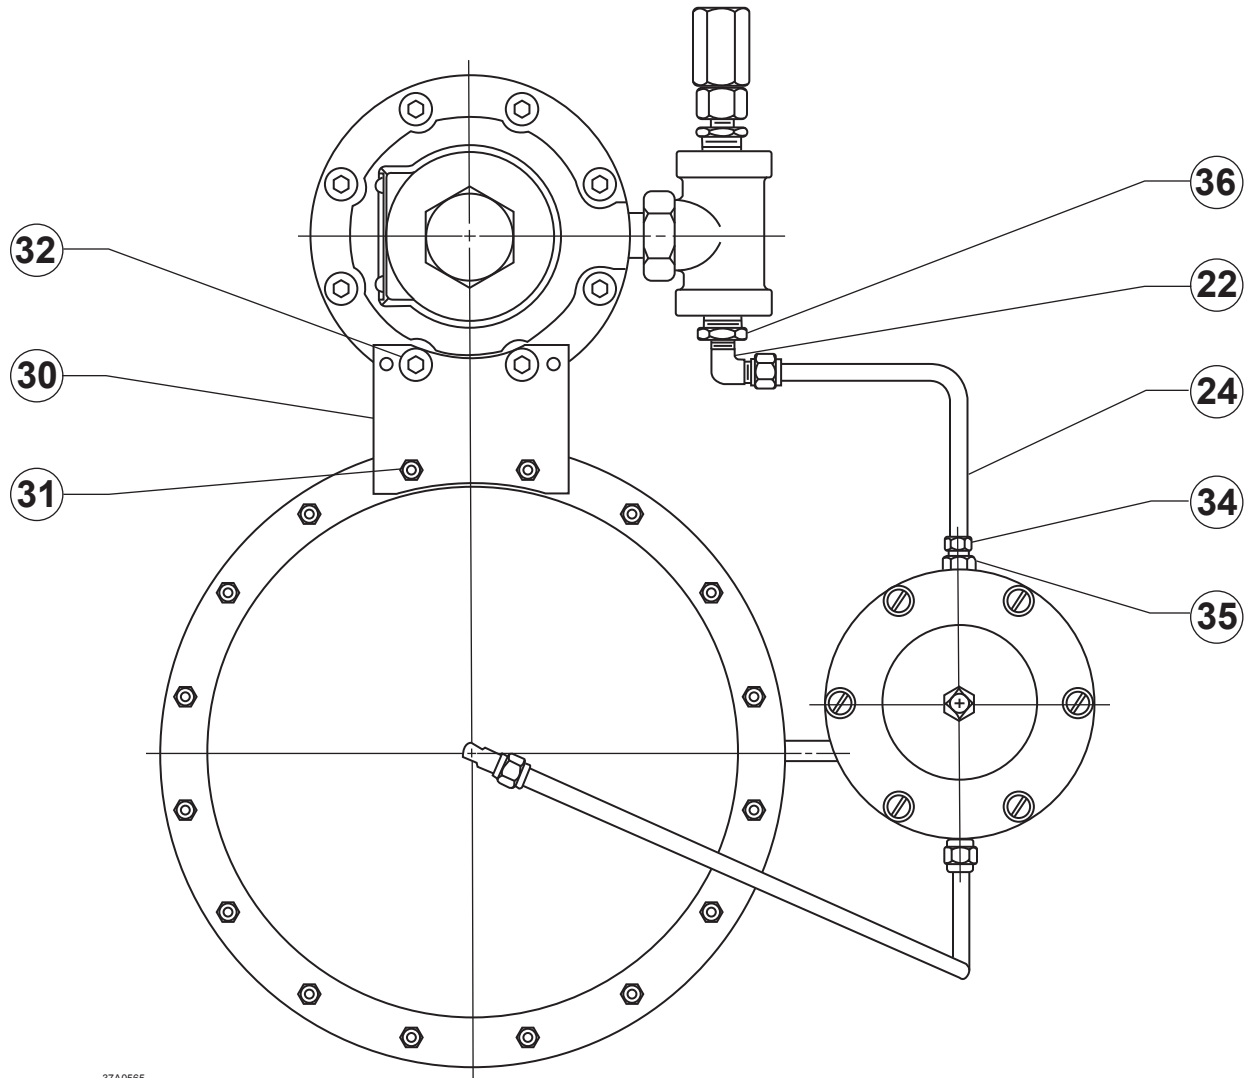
61 Series Pilot and Type 1806 Relief Valve Mounting
